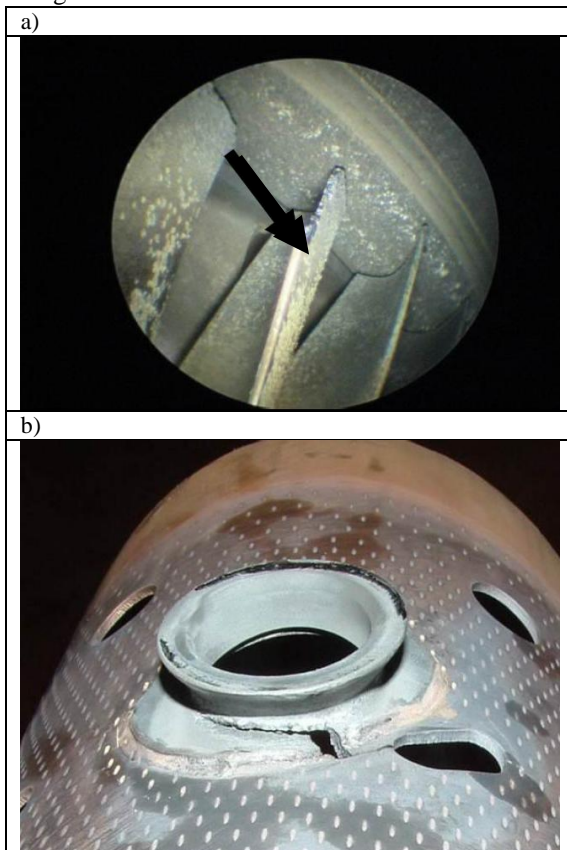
Partly burned or cracked gas turbine elements: a) high-pressure turbine rotor blade tips, b) flame tube [2]
